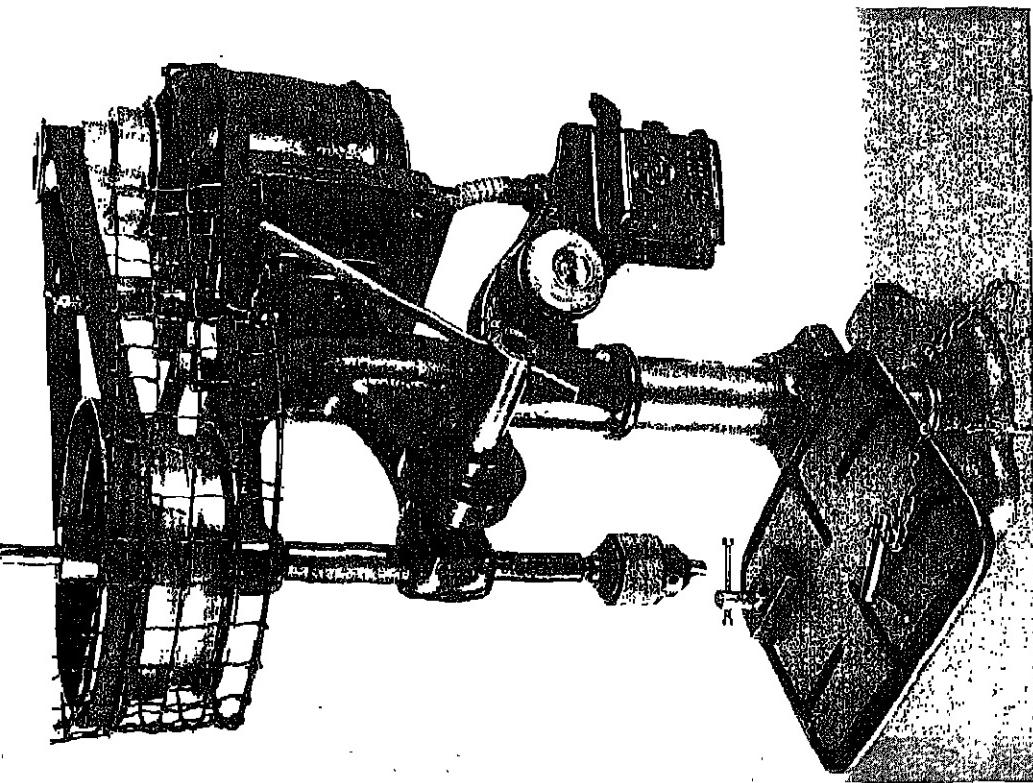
A. POWER DRILLING MACHINE—THREE-SPEED SELF-CONTAINED MACHINE
